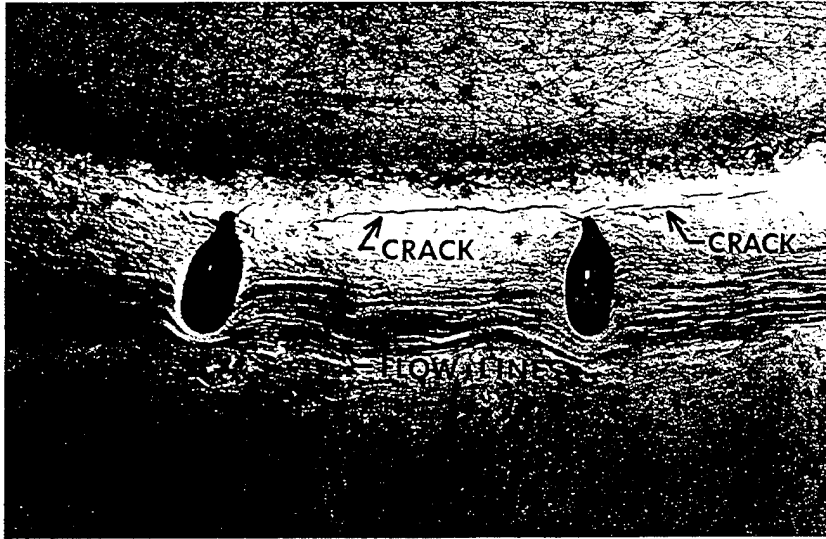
Transverse section of unburned tube showing small cracks near inner diameter edge. Magnification: 12.8X.
